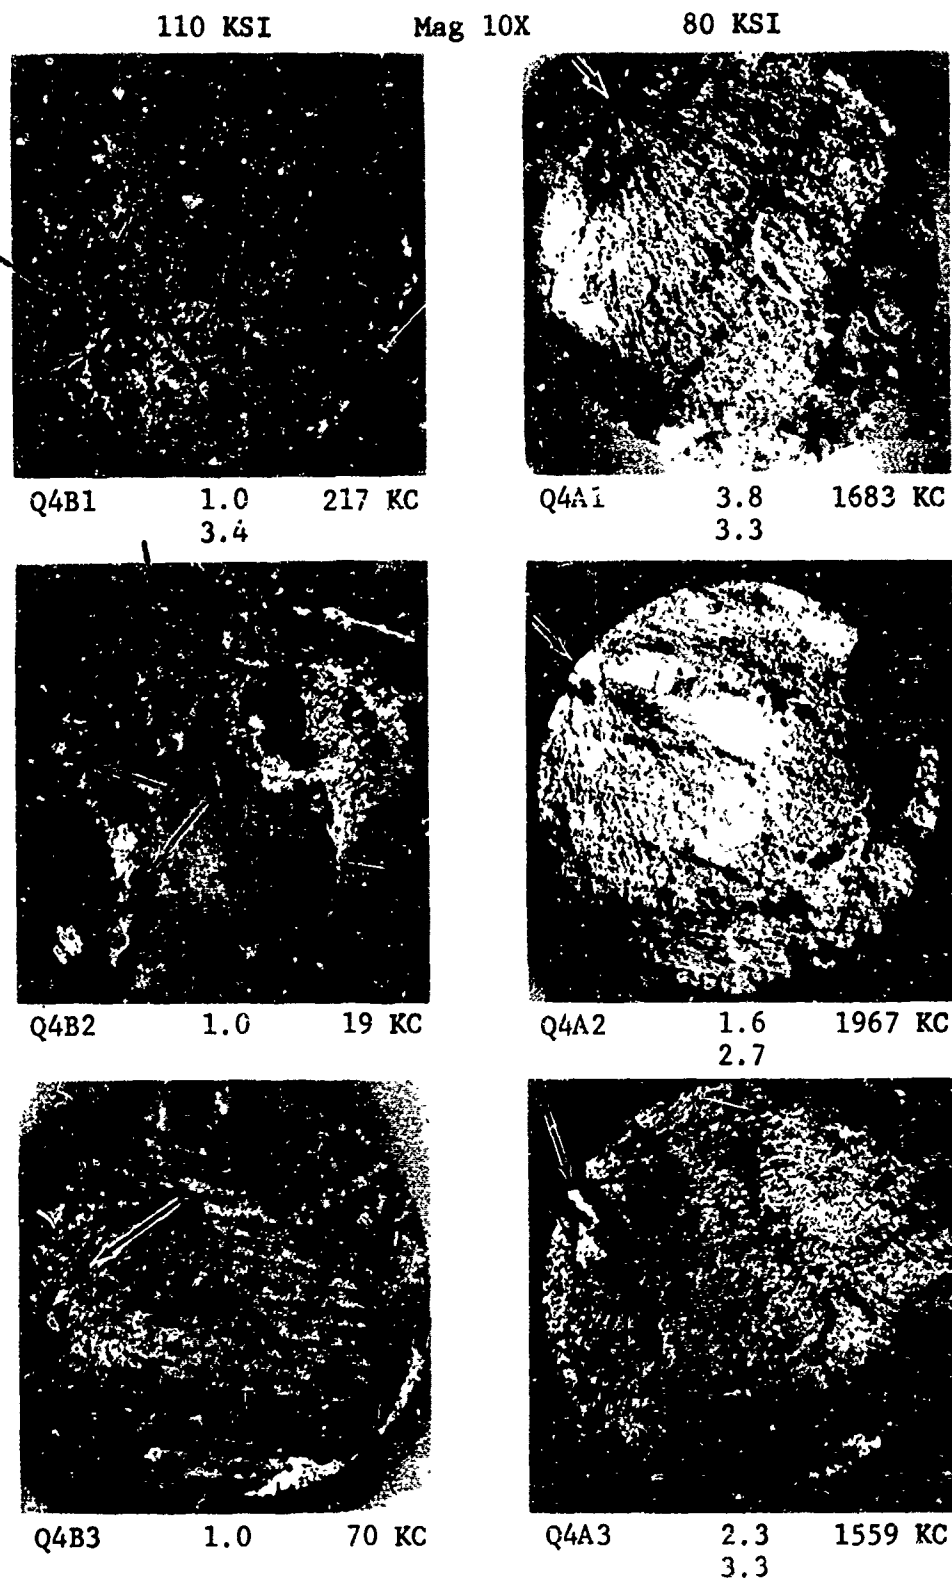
Fracture Surfaces of Failed Fatigue Specimens Series Q4-
